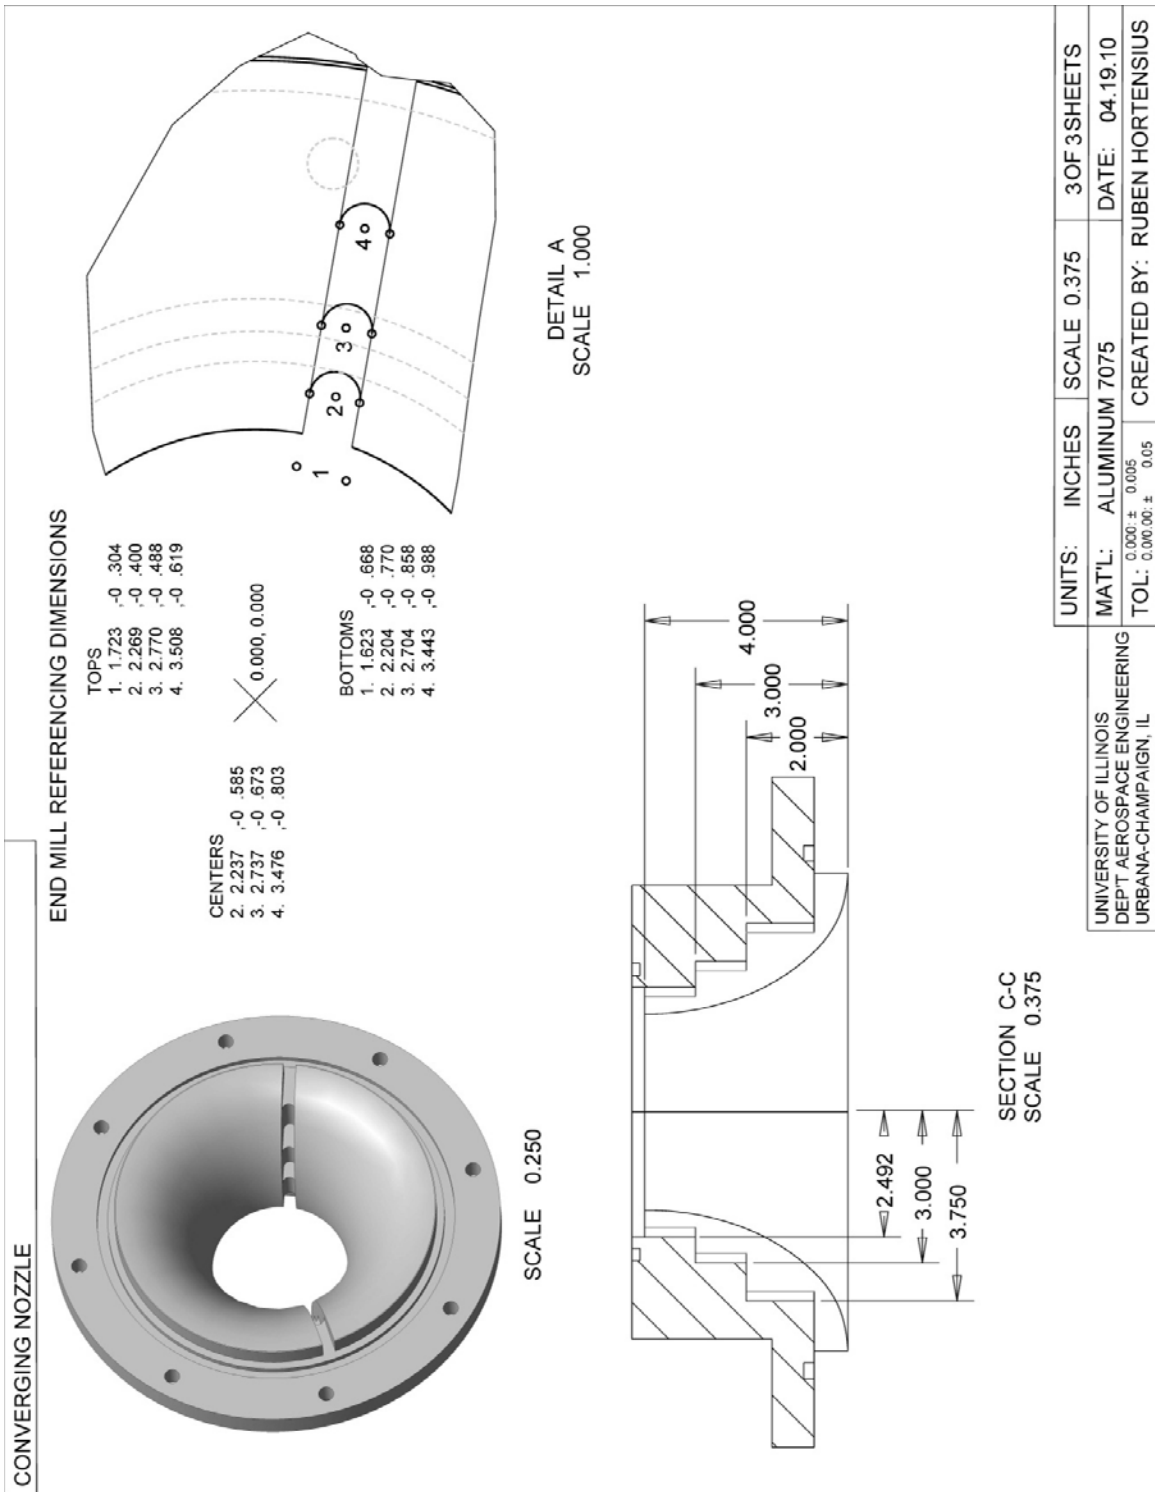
(cont.). Converging Nozzle Engineering Drawing.
